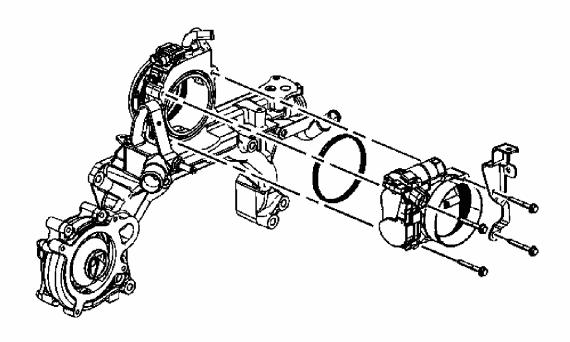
View Of Throttle Body Assembly Courtesy of GENERAL MOTORS CORP.
